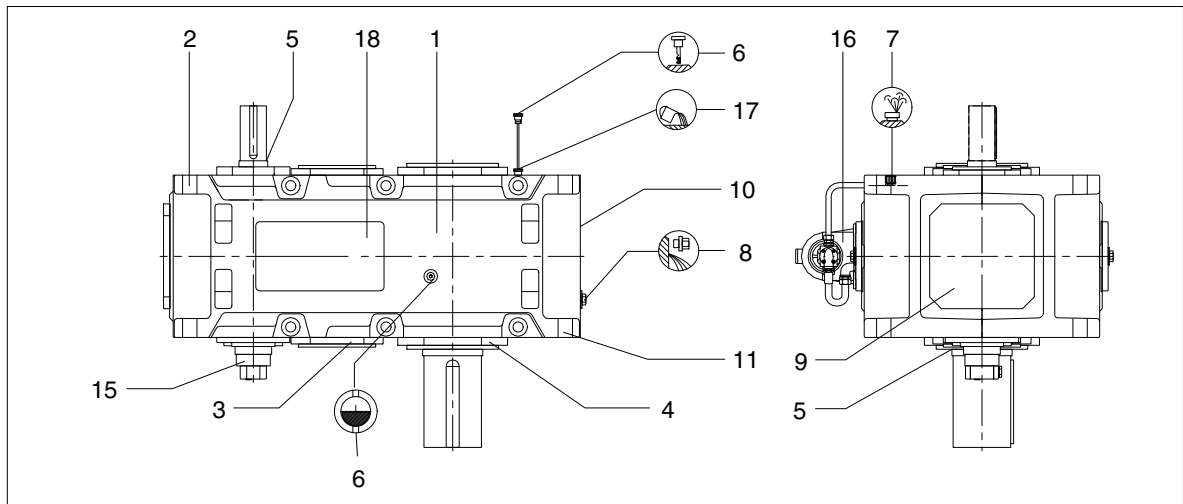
Gear-unit features on gear units type H..V with add-on oil-supply system
